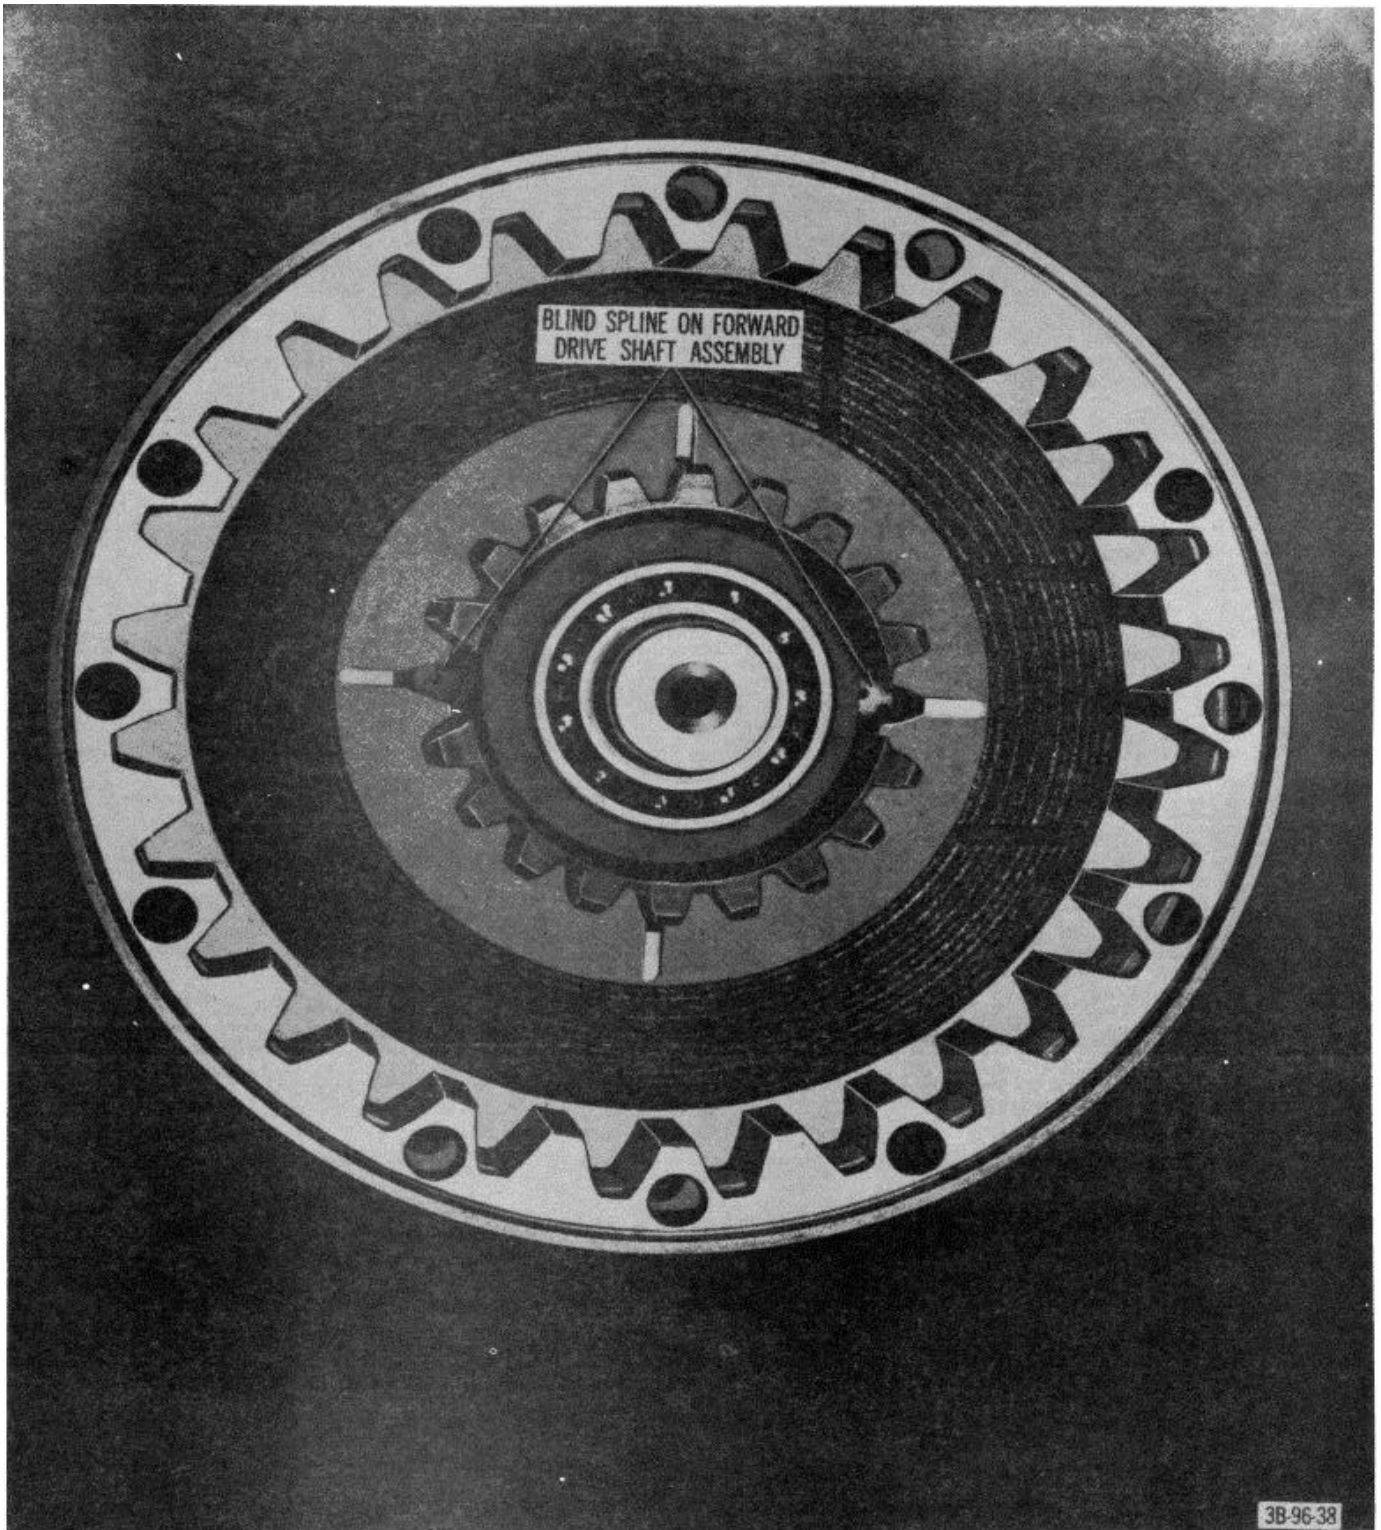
Friction disks aligned with the blind spline on the forward drive shaft assembly.
